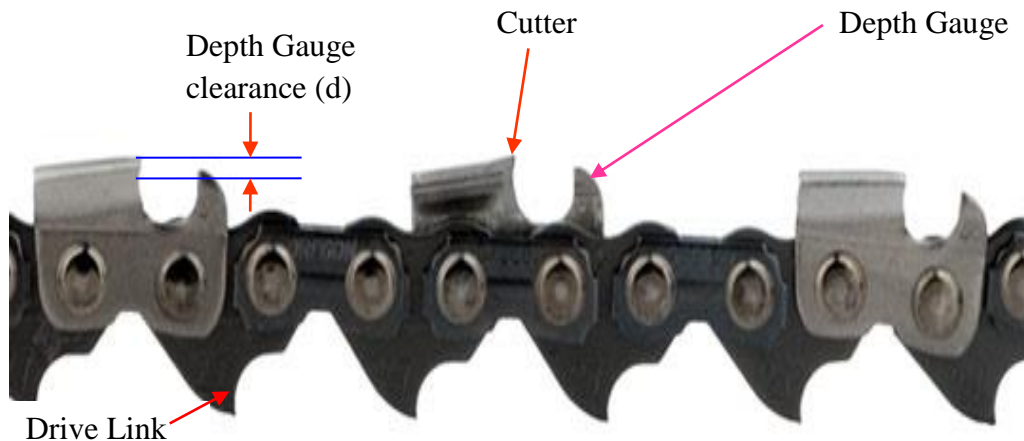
Parts of a chain, cutting angle and depth gauge.
